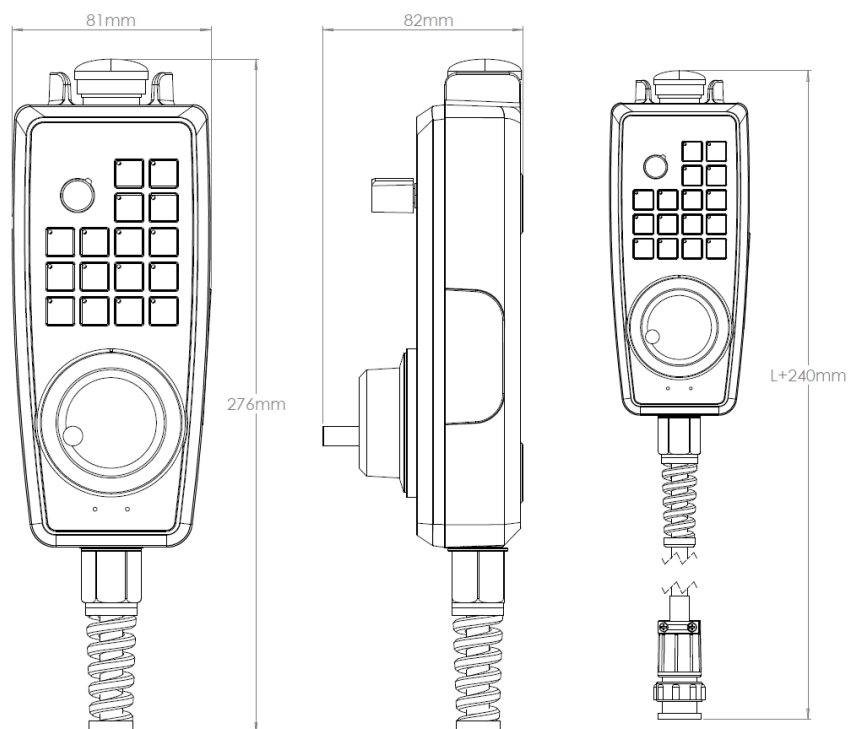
Remote Pendant Lite Dimensions (mm)
